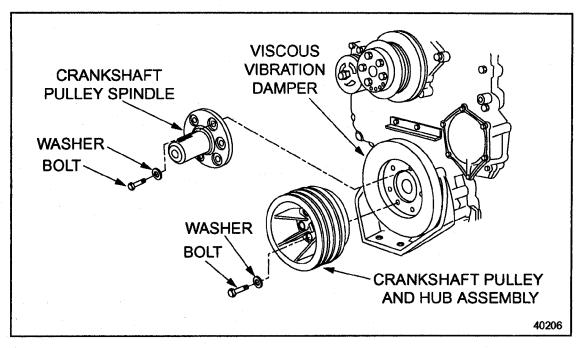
Viscous Vibration Damper Mounting with Crankshaft Pulley or Crankshaft Pulley and Hub Assembly with Spindle
